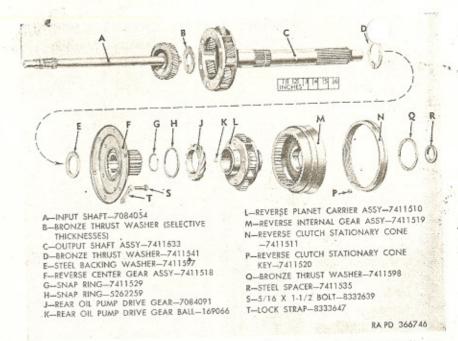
Output shaft, reverse unit, and input shaft (303M).
